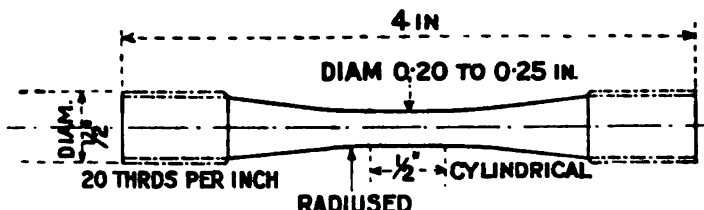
TEST PIECE TO BE USED IN HAIGH MACHINE.
